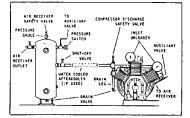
Typical piping arrangement for compressor and detached receiver.
